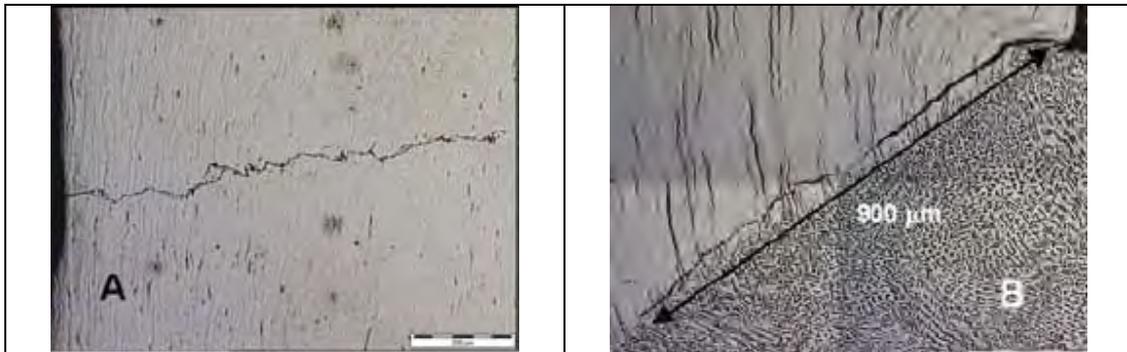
Crack of 900µm near the S1 weld root	Fig.10b: Crack of 900µm at the S1 weld toe
